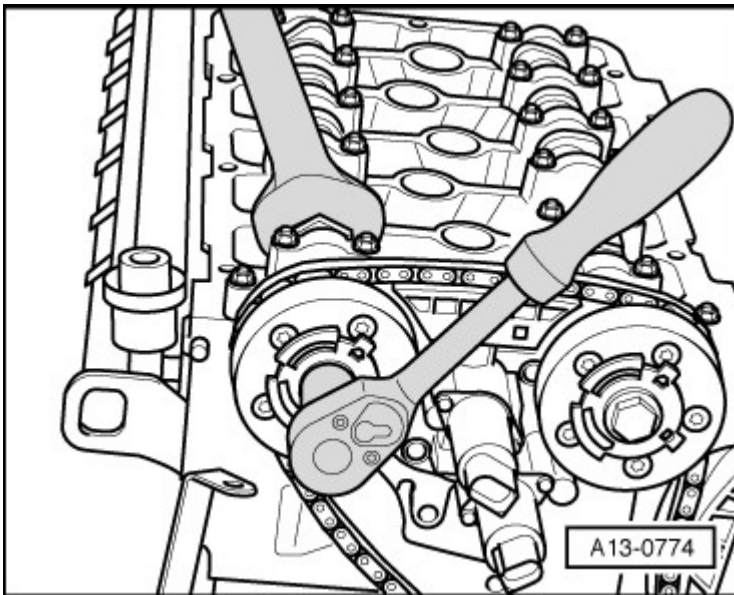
Identifying Tools To Loosen Intake Camshaft Adjuster Bolt
